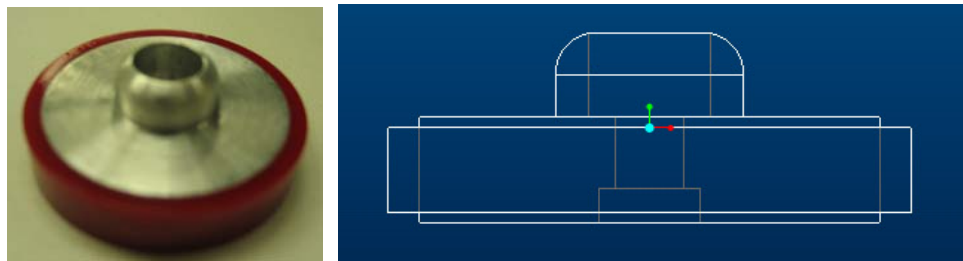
Friction Wheel (Left) Coated with ML-6 (Red) Compliant Friction Coating and Drawing of the Wheel (Right)
